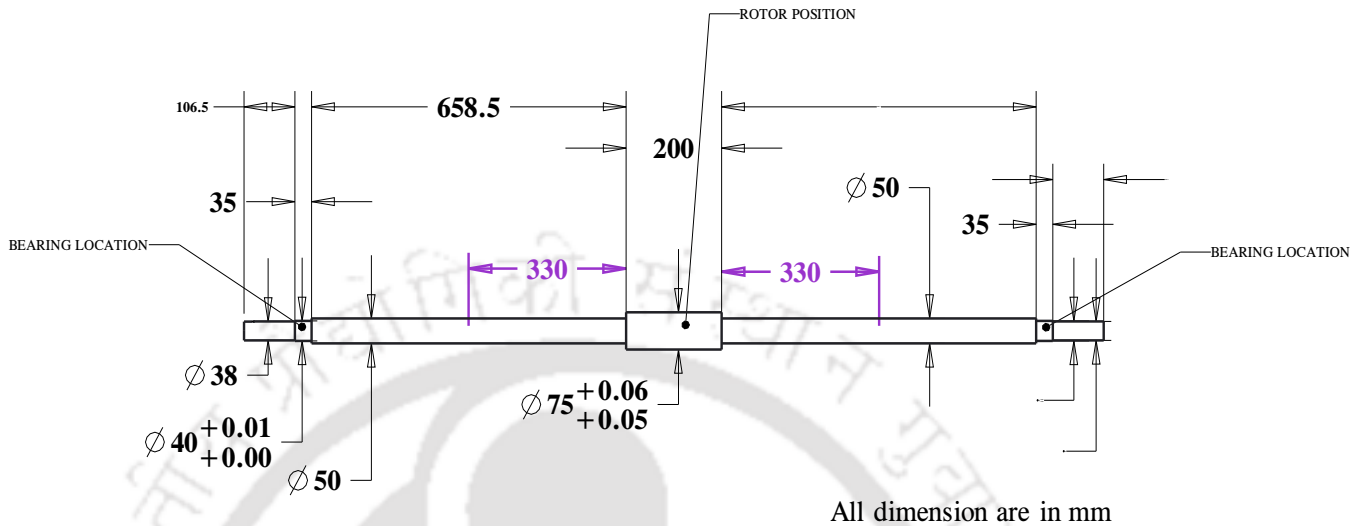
Dimensions of a flexible rotor shaft type III or Rotor III.
